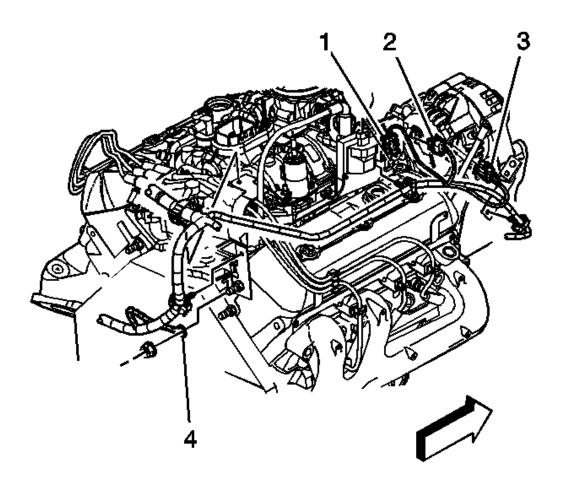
Ignition Coil, Ignition Coil Driver, Ground Nut/Cable & Generator Electrical Connectors Courtesy of GENERAL MOTORS CORP.
